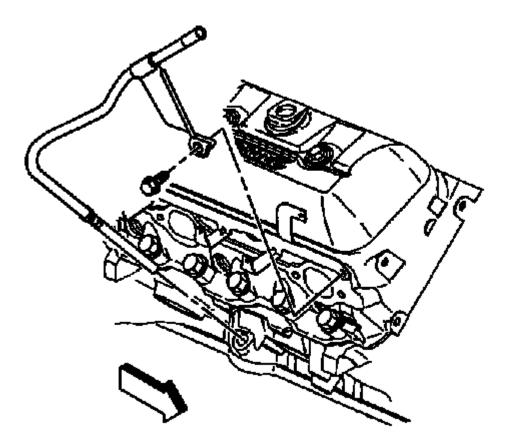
View Of Oil Level Indicator Tube & Bolt Courtesy of GENERAL MOTORS CORP.
